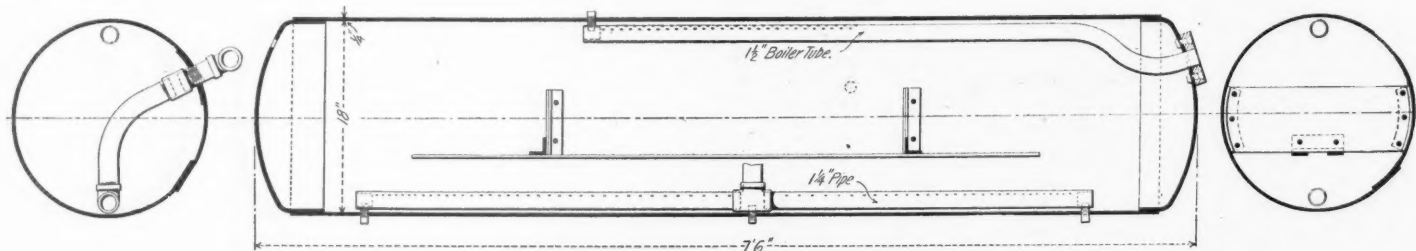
Heater for Compressed Air Motor Car—April, 1900.
